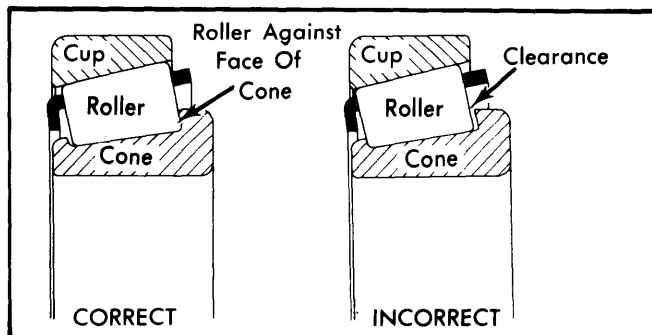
View Showing Correct & Incorrect Bearing Roller Position
